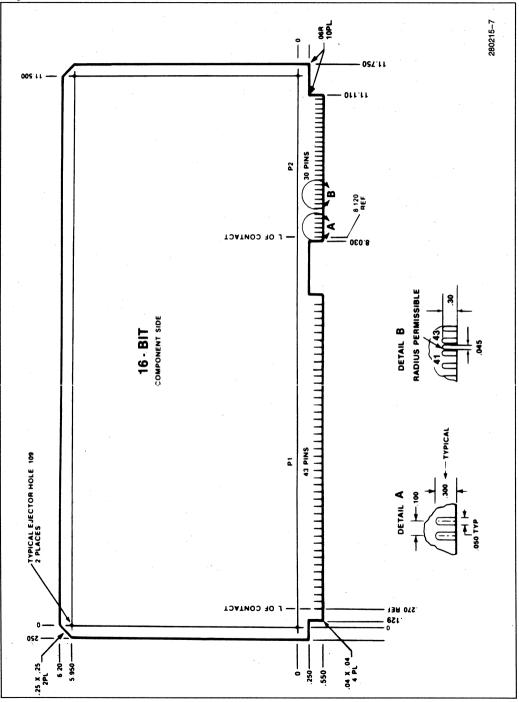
iLBX™ Bus Standard Printed Circuit Board Outline
